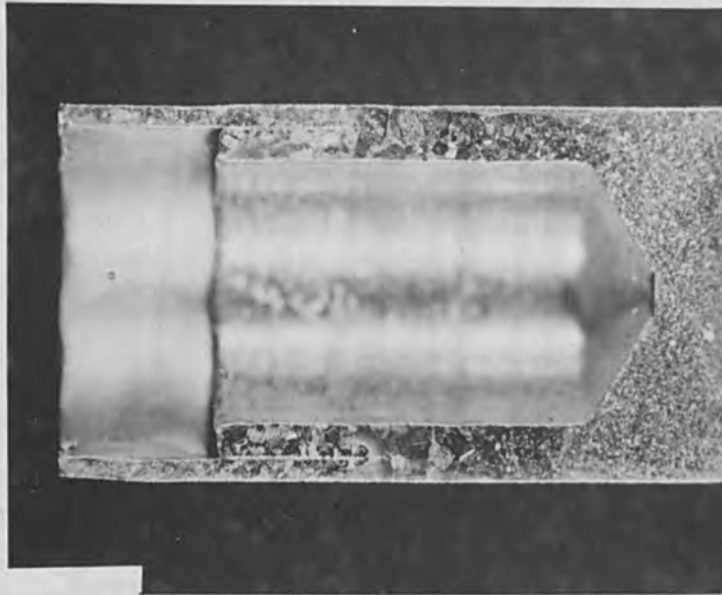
Macrosection of an electron-beam weld in a nuclear fuel element.
